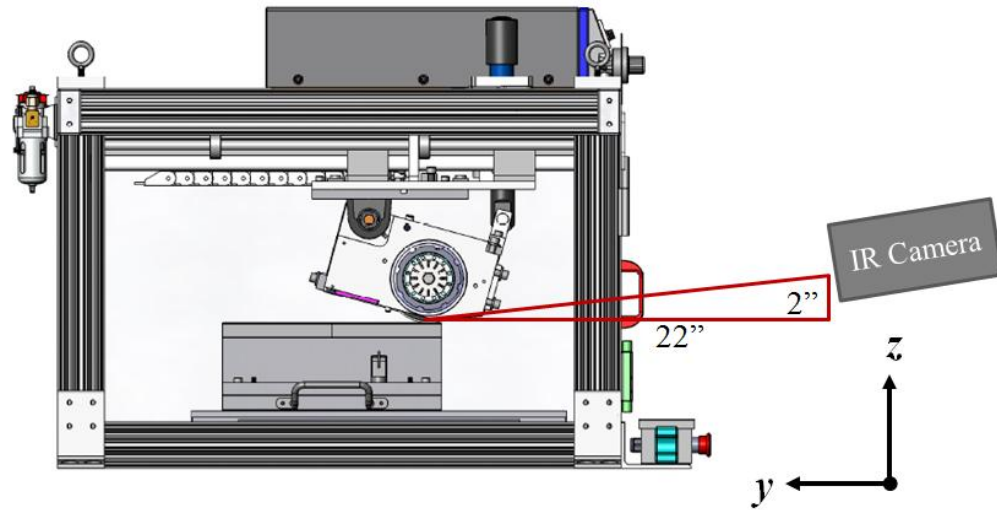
Schematic of the ultrasonic welder and the IR camera position.
